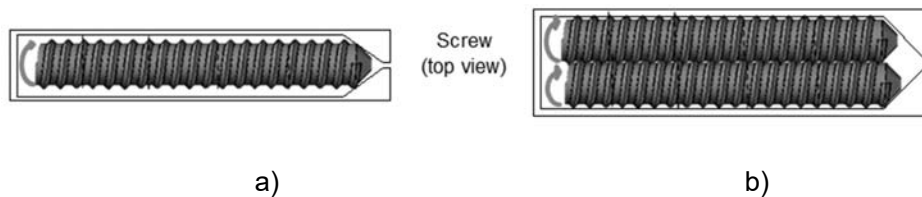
Different types of rotating screw (top view); a) single screw, b) twin screw.
